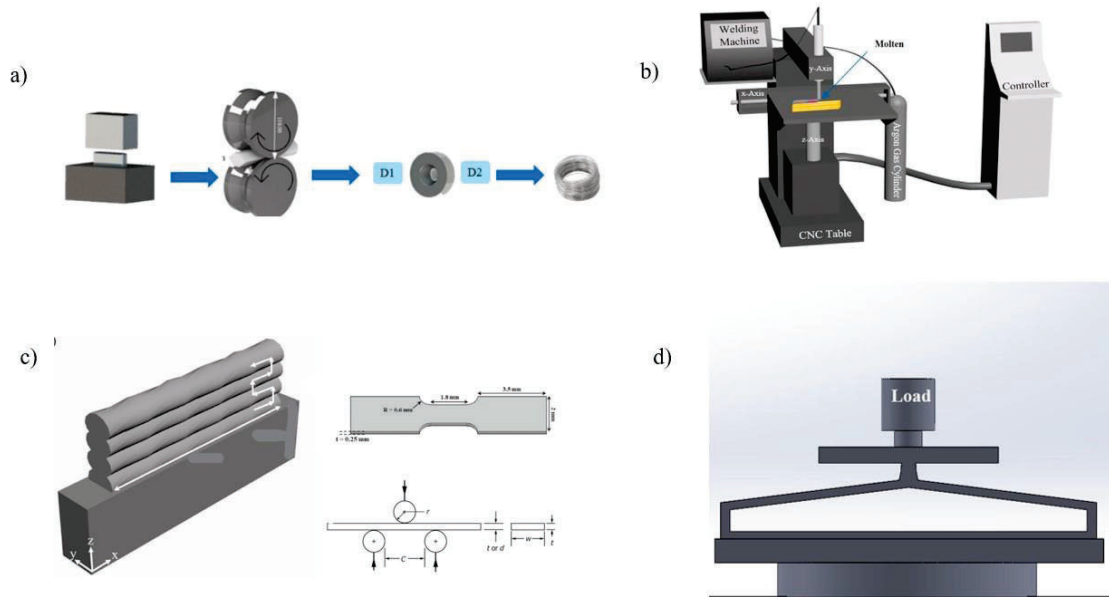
Schematic illustration of the feedstock preparation process, including hot forging, hot rolling, and wire drawing. (b) Wire Arc Additive Manufacturing (WAAM) setup used for printing Fe-SMA and carbon steel specimens. (c) Printed wall and the extracted specimens for tensile and bending tests (shape memory effect). (d) Schematic representation of the compression testing configuration used for mechanical evaluation.
